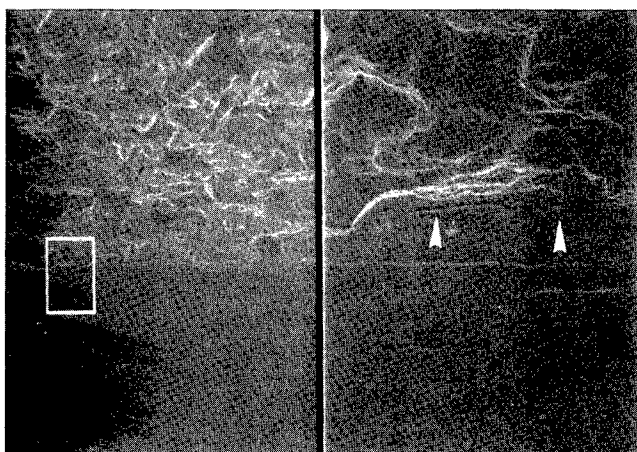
Box at left shows edge of fracture (upper) and keyway surface (lower). Mag: 50x
